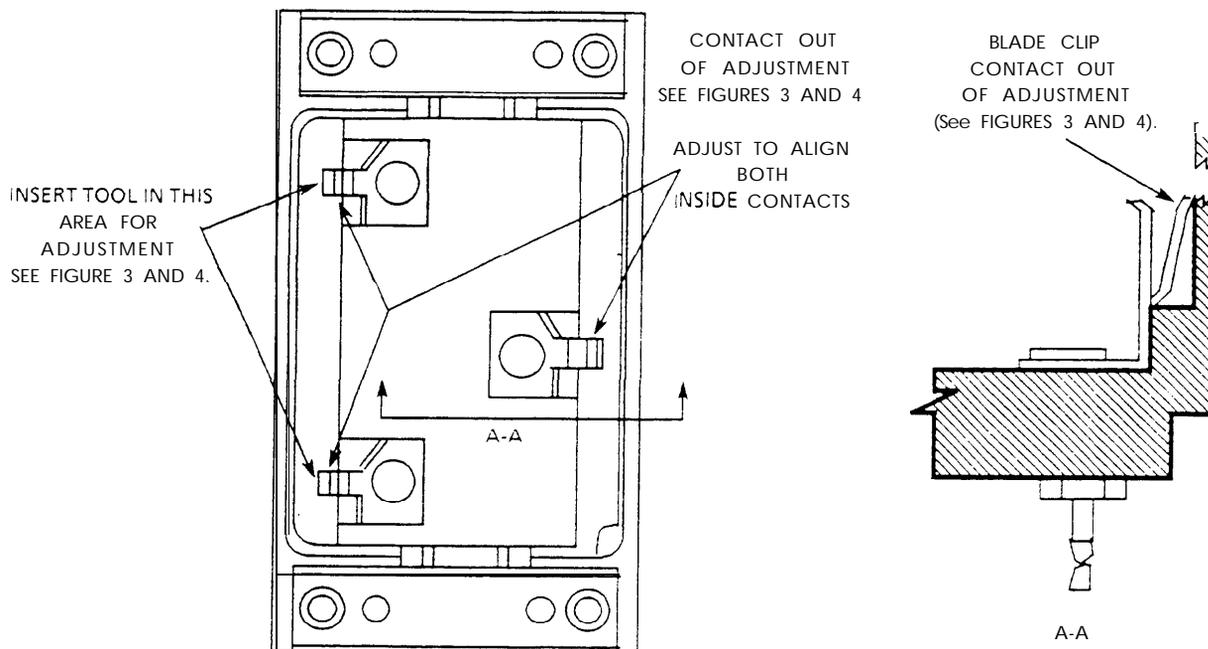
View of Blade Clips Showing Misaligned and Improper Contact Adjustment.
